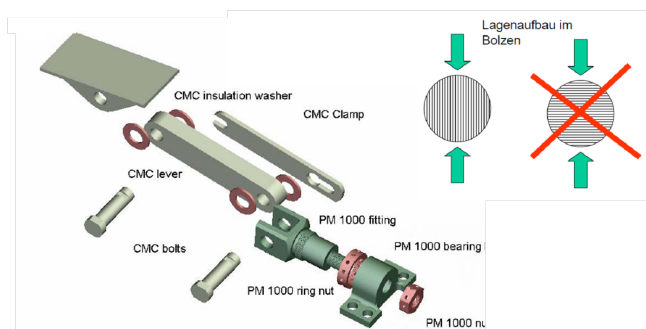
Explosion view of X-38 nose cap attachment assembly.
